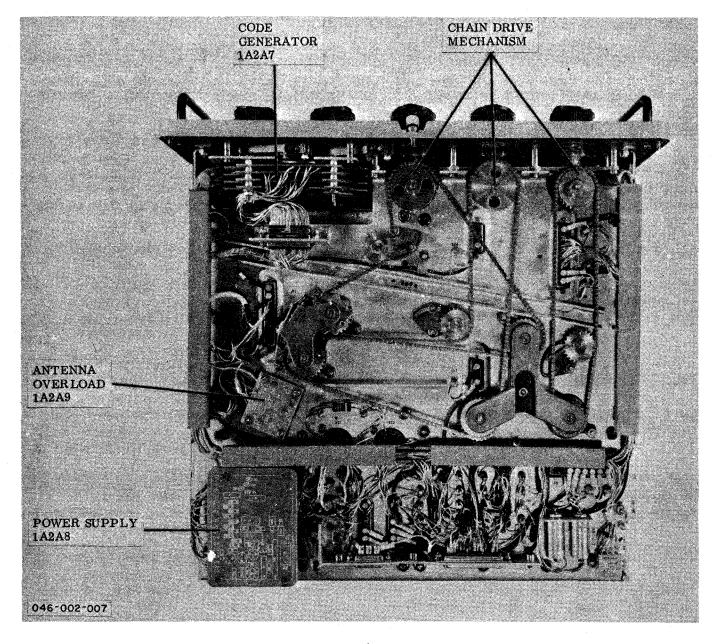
Radio Receiver R-1051B/URR, Bottom View, Case Removed
